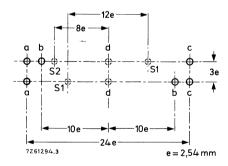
Hole pattern in the printed-wiring board for a tandem potentiometer (viewed on component side).
